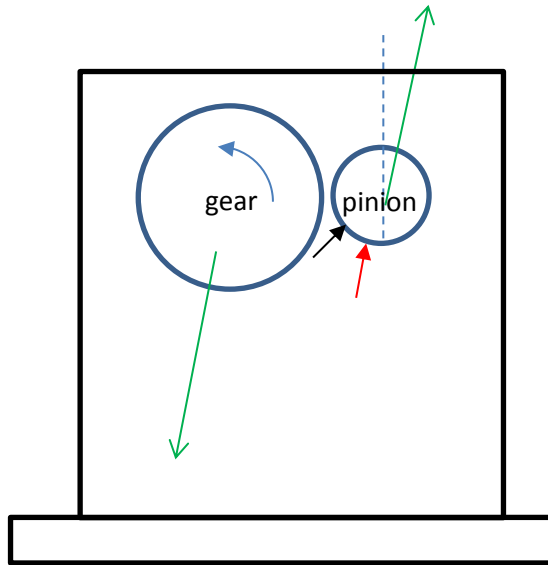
Generator gearbox showing design gear loads vectors (green), original pressured dam location (black), and modified (red) on pinion
